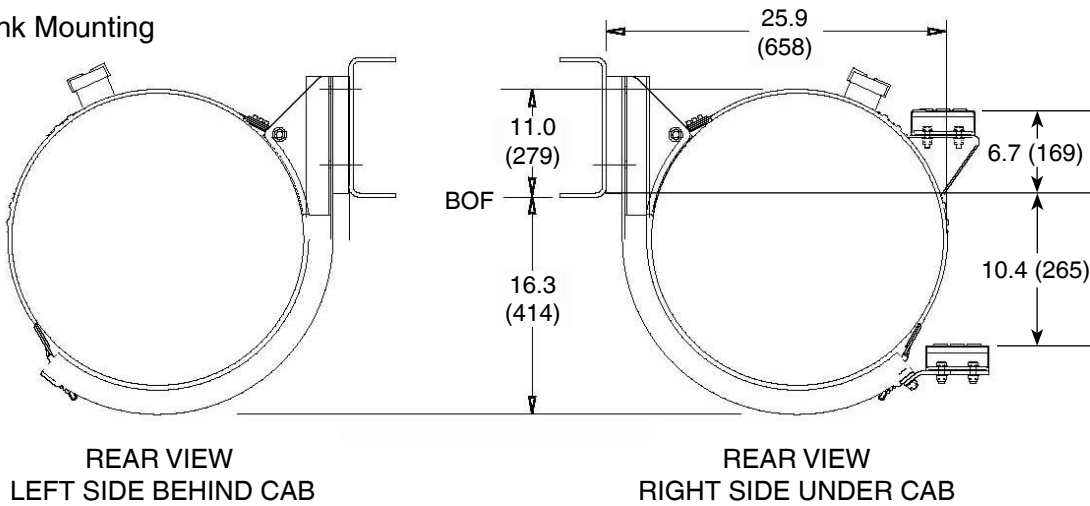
T270/370 22" Fuel Tank Mounting Measurements [inches (mm)]
